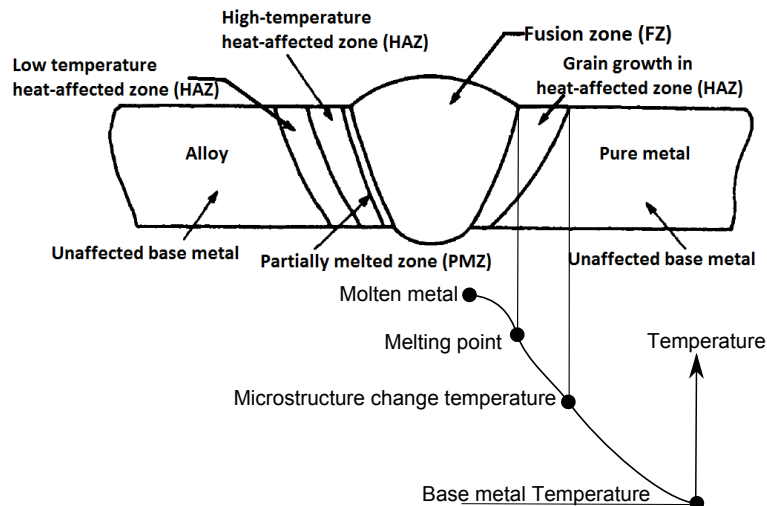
The classical zones in a weld [13]. Right half shows the weld regions in pure metal and left half for a alloy
